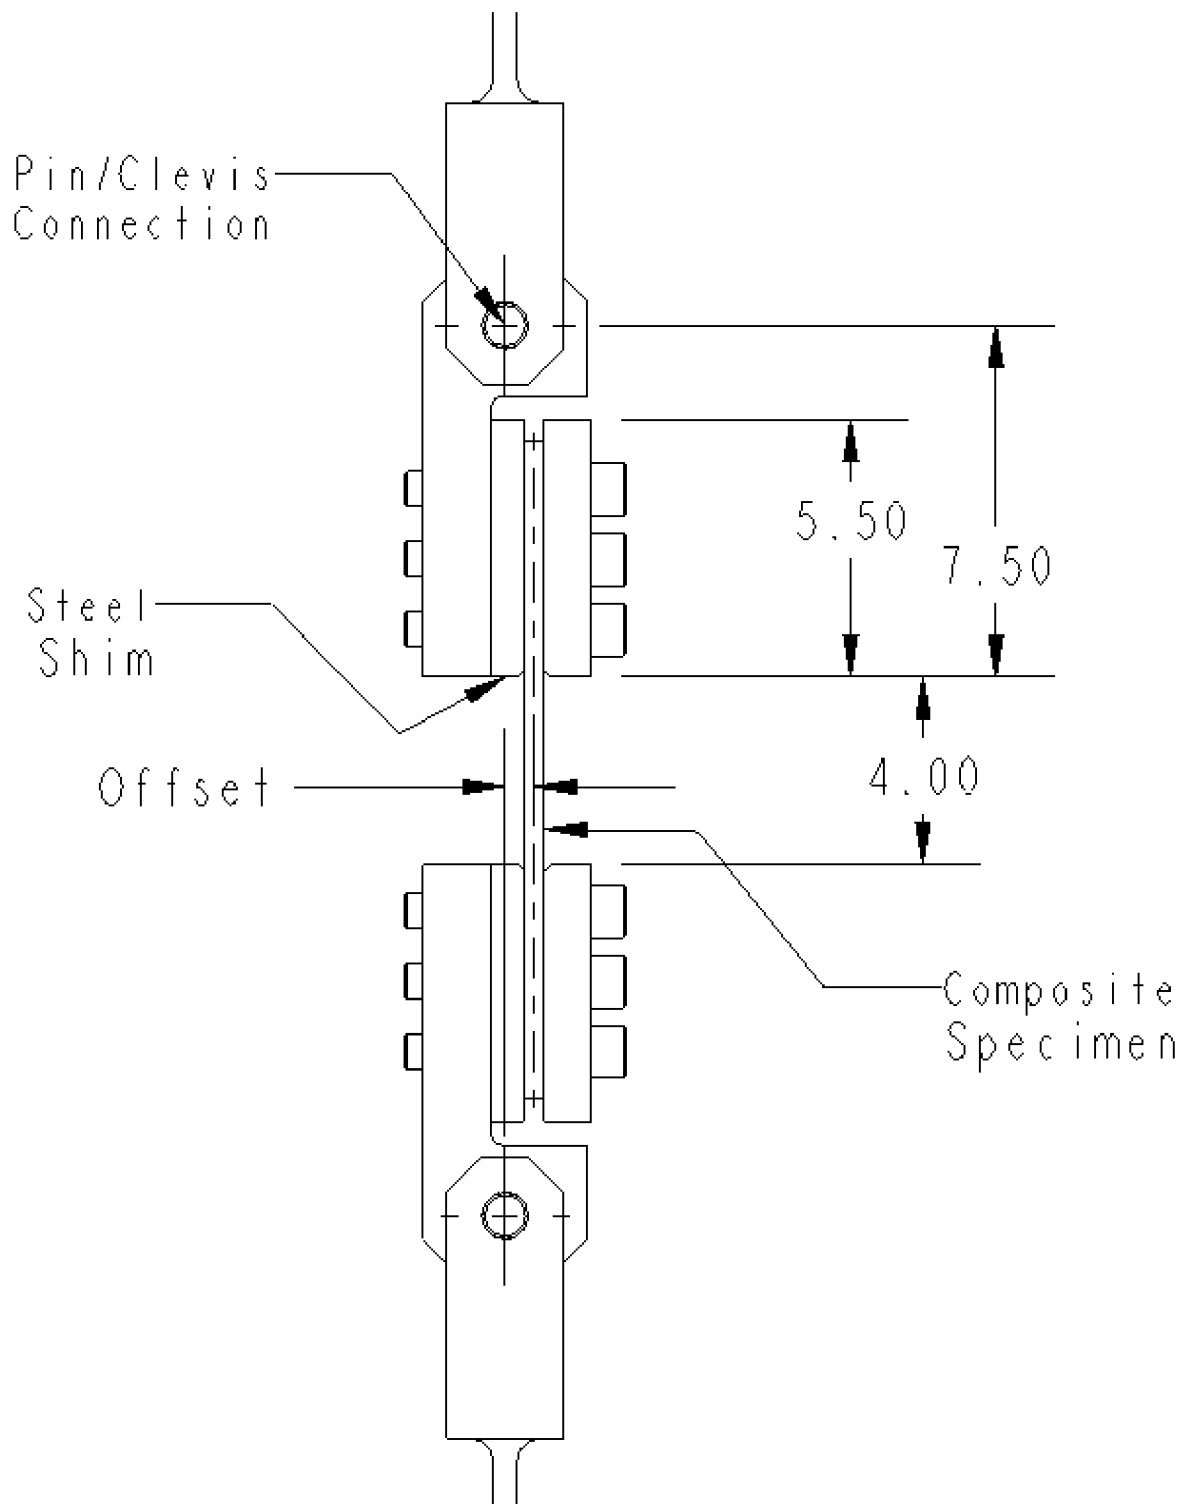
Combined bending and tension fixture diagram (Dimensions in inches).
